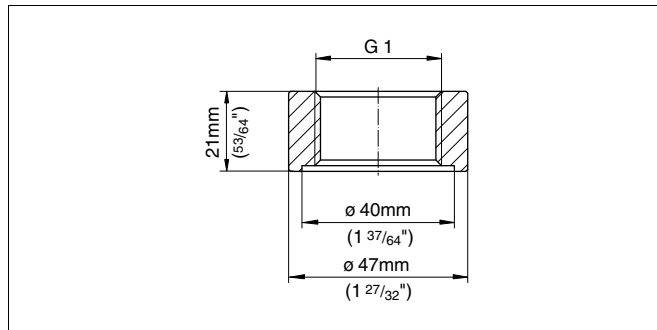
Dimensions welded socket G1 A acc. to ISO 228-1
